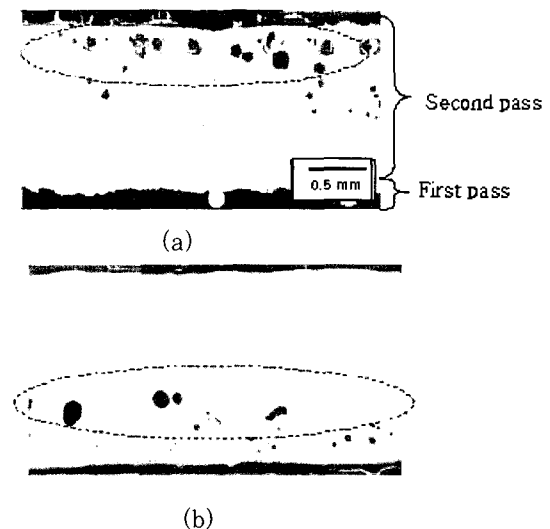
Inner cavities in longitudinal section of weld of a) 1650W, 1.2m/min full penetration b) 1350W, 1m/min partial penetration
